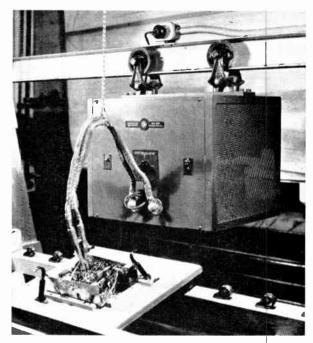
Capacitor welder on radio receiver production line, for welding of connections
